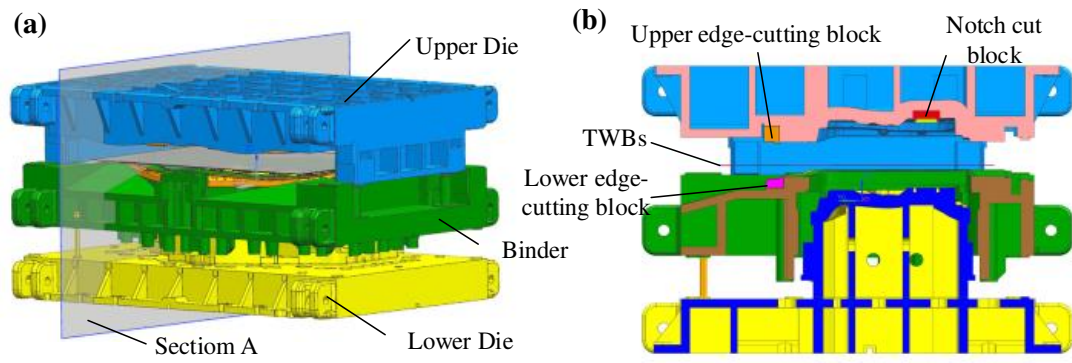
Drawing tools: (a) three-dimensional models; (b) view of section A
